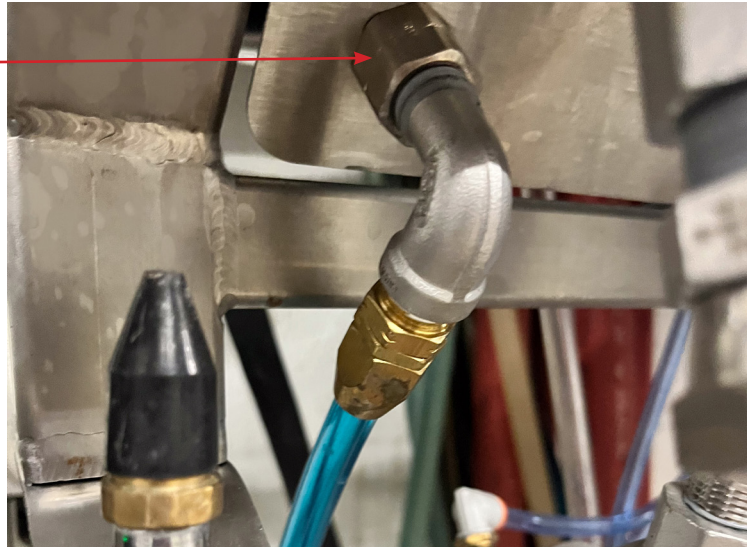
2 - Bulkhead fitting for Airgun kit
